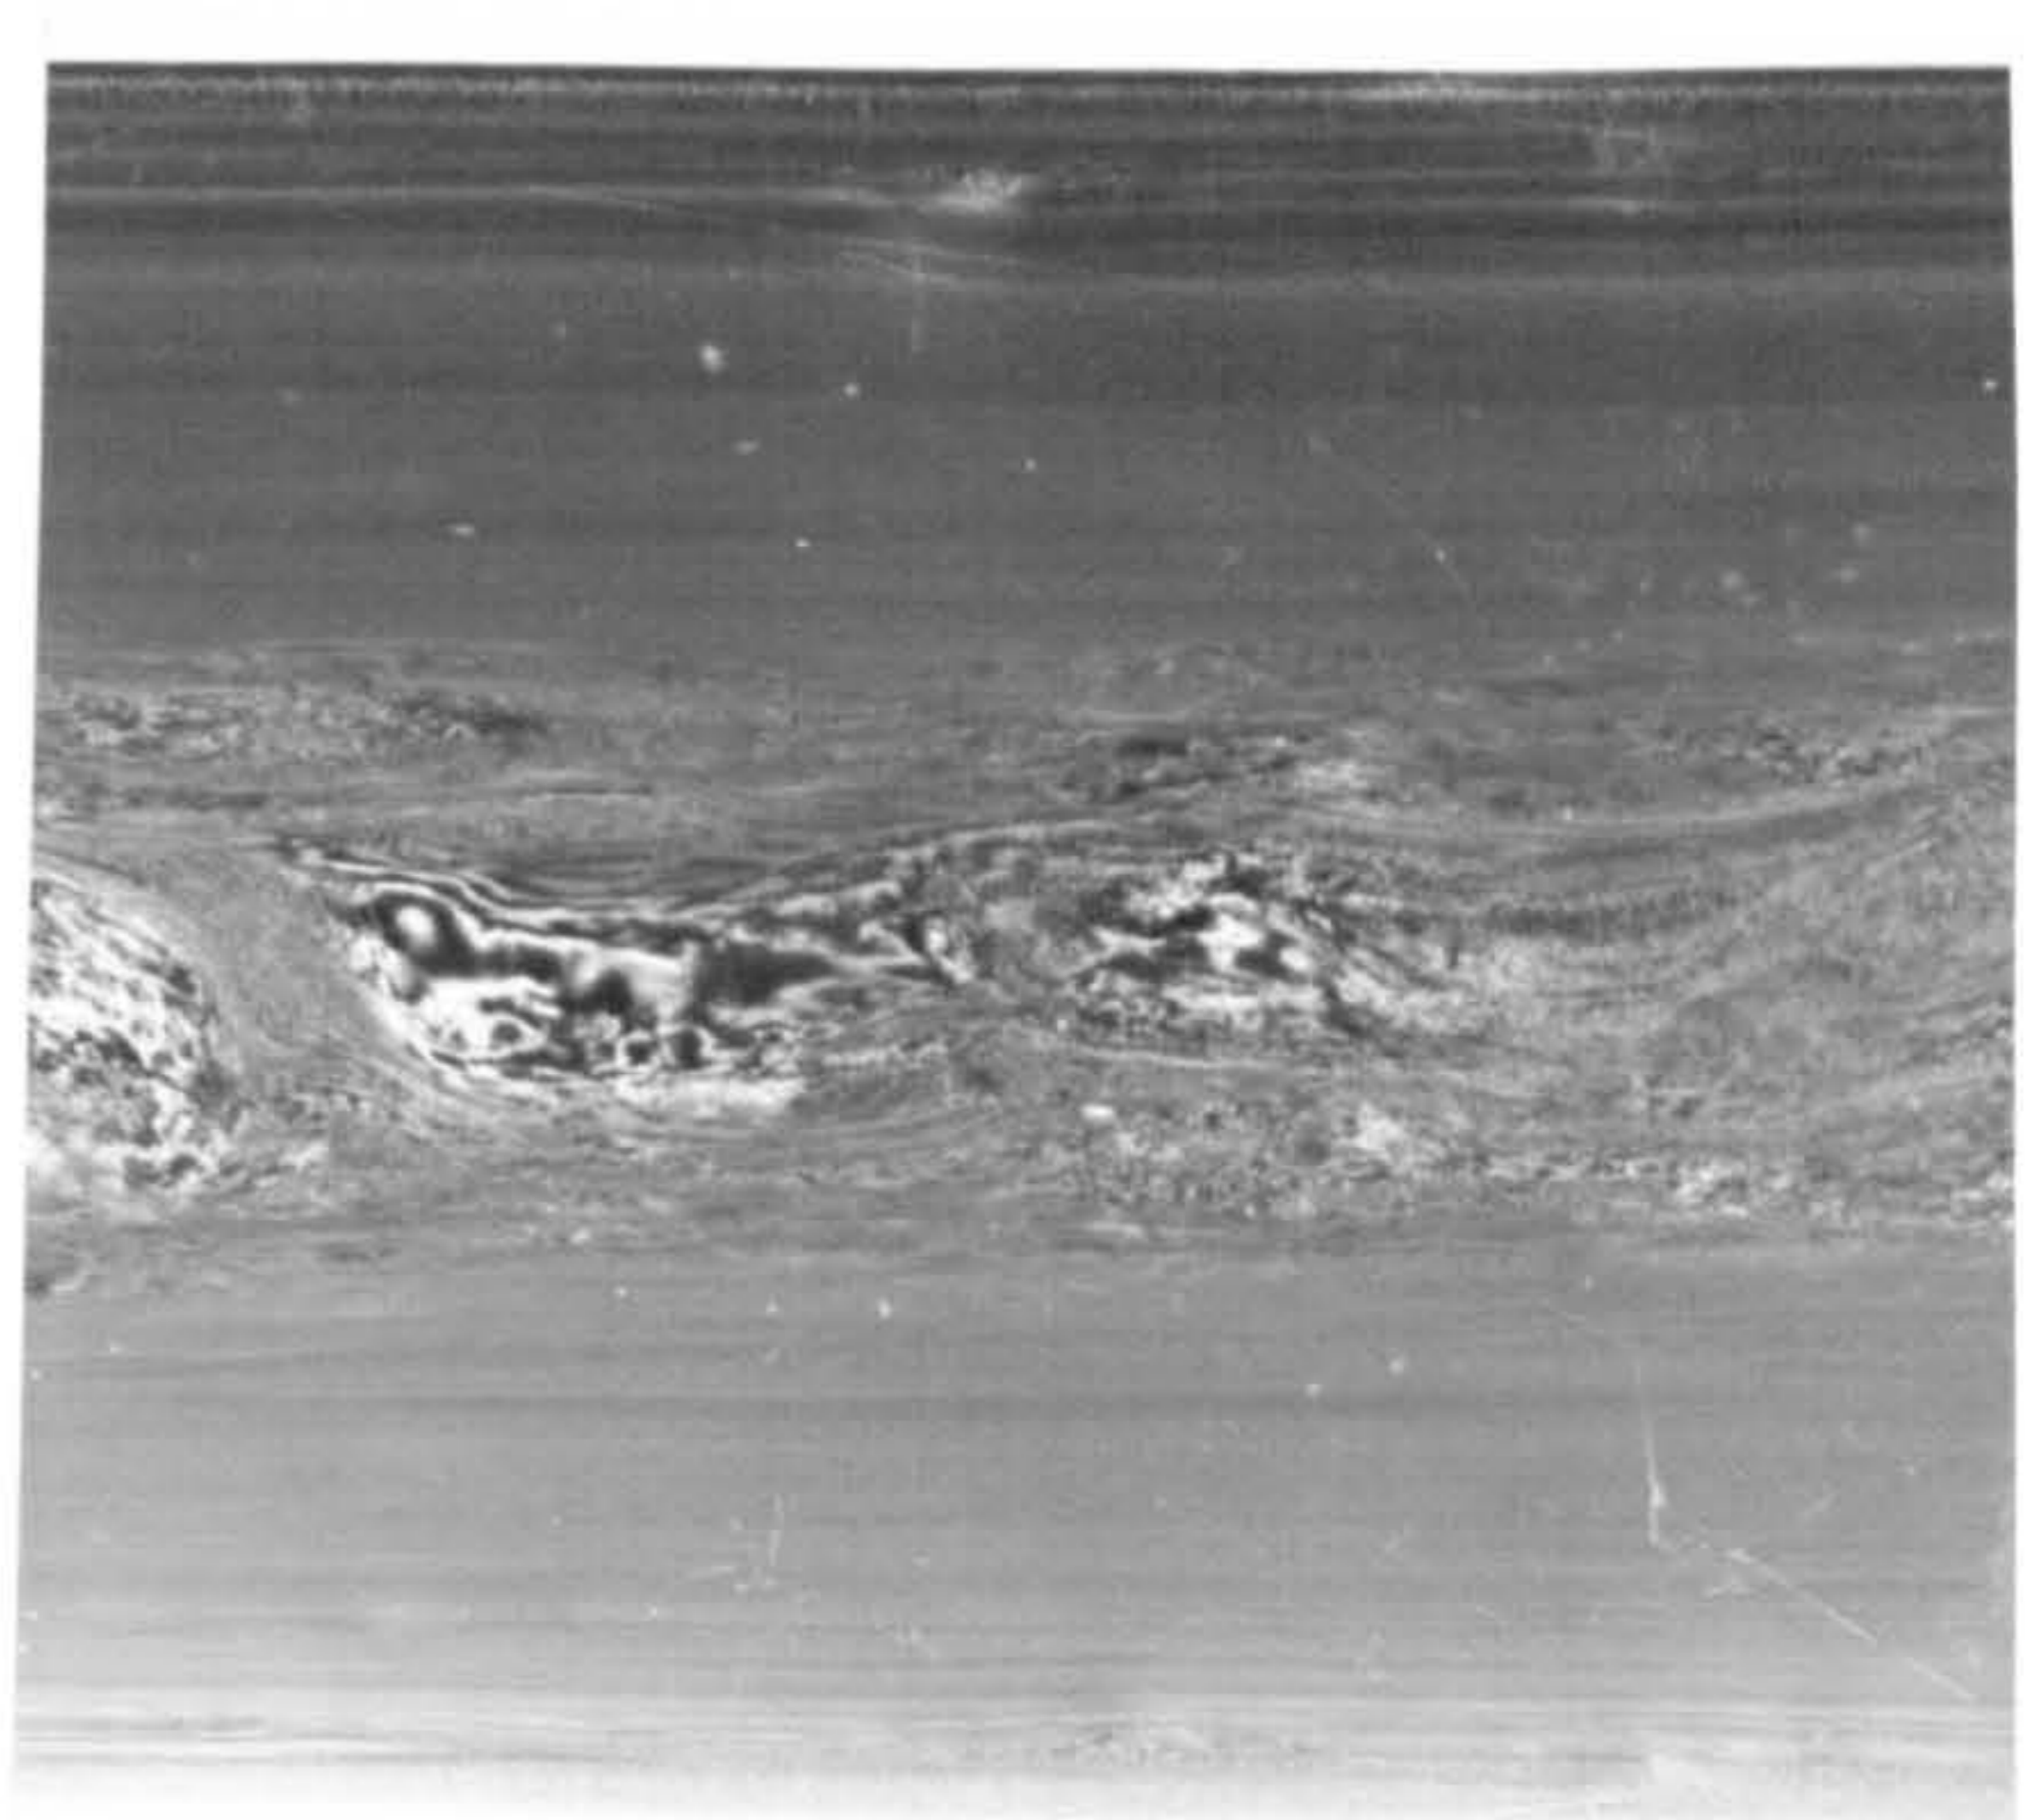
The photographs of sections in the main part of SCORIM rectangular bar moulding:
